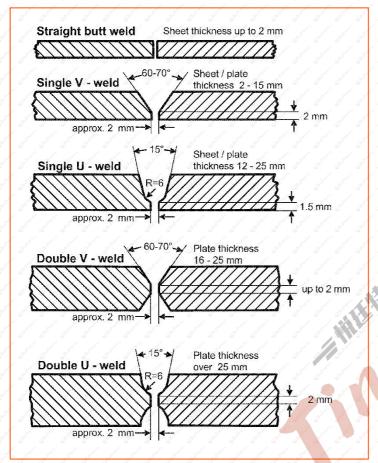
Seam preparation for welding nickel alloys and special stainless steels
